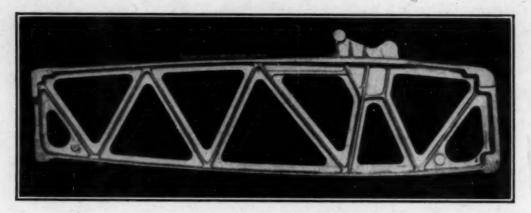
Large Wing Support Forging. 14S-T Alloy.
